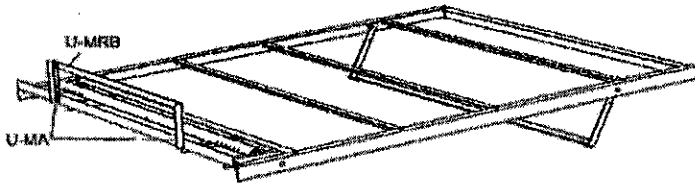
Illustration depicting mattress stay angles and mattress stay bar attaching to spring bar assembly (weldment).
